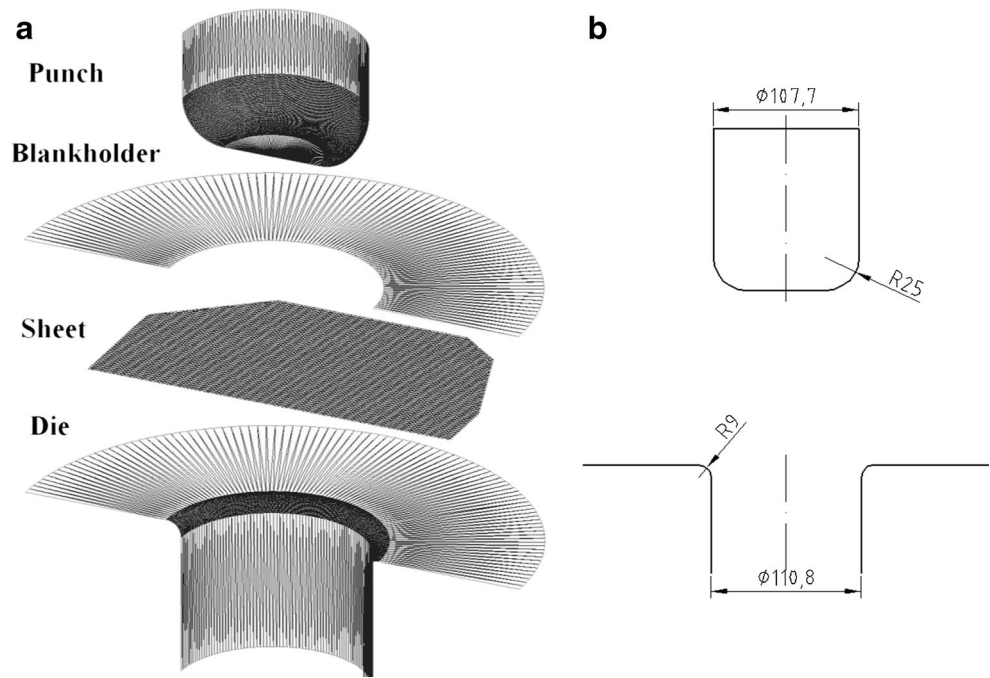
Multi-step deep drawing industrial application: a finite element mesh used for the simulation of the second step and b punch and die dimensions (in mm)
